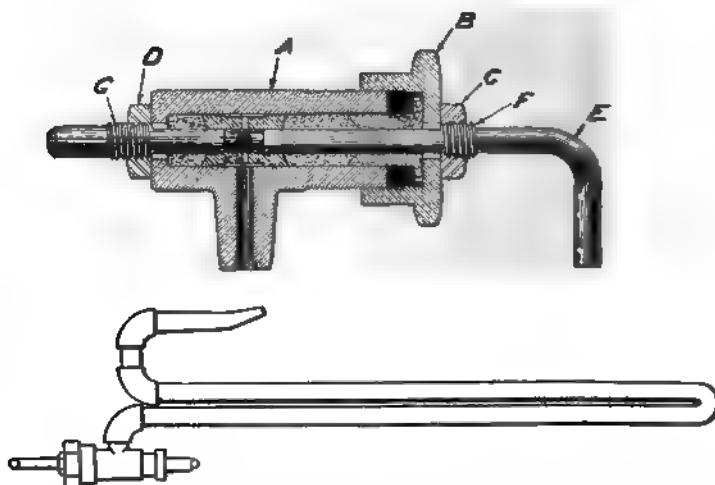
Usual pattern of "torch" head and starting "torch," used on several American steam carriages. The head parts are lettered as follows: A, body of head; B, threaded cap; C and D, nuts working on screws, F and G, on rod, E. Screw, G, gives attachment to the collar on the valve stem, as shown at B, in the succeeding figure.
